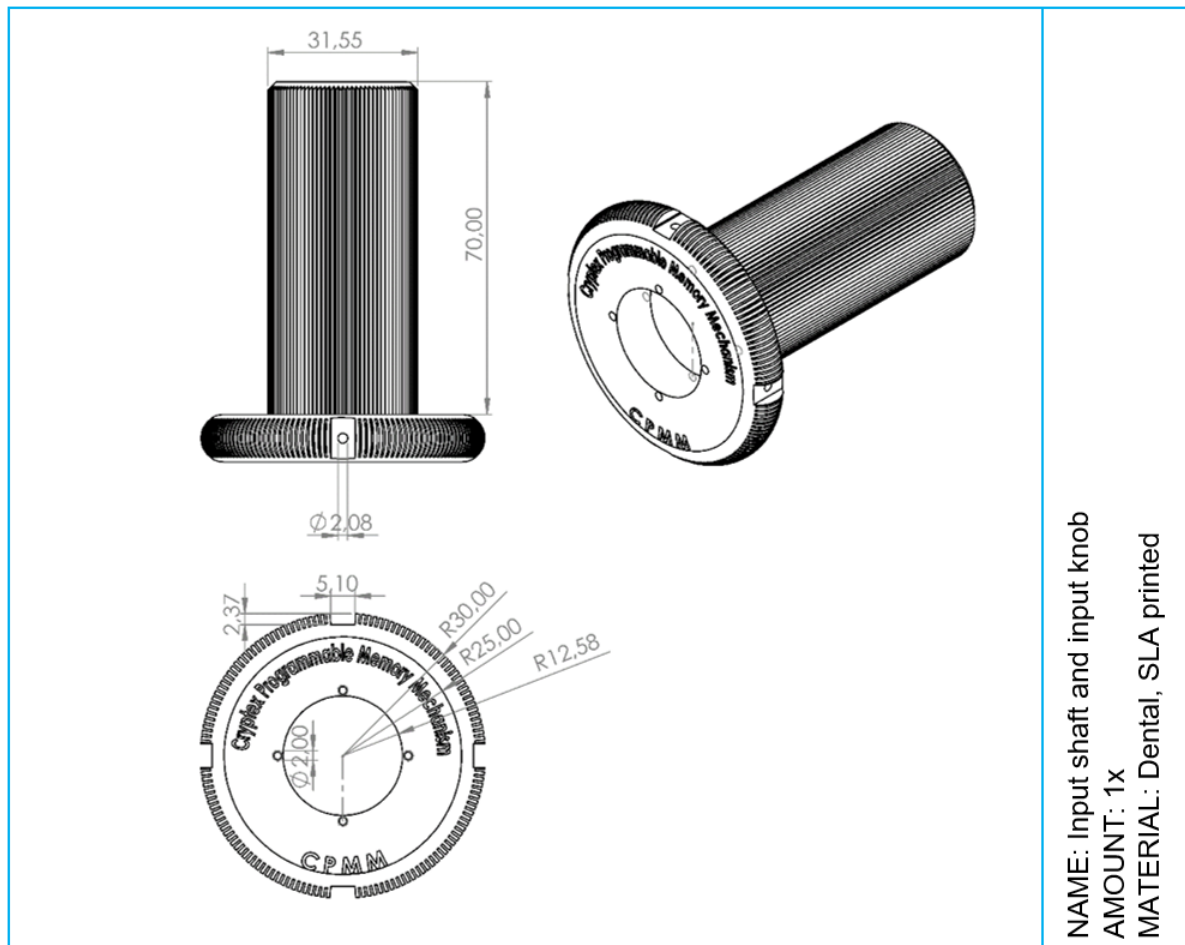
Construction drawings of input shaft and the input knob combination - 3D Printed prototype
